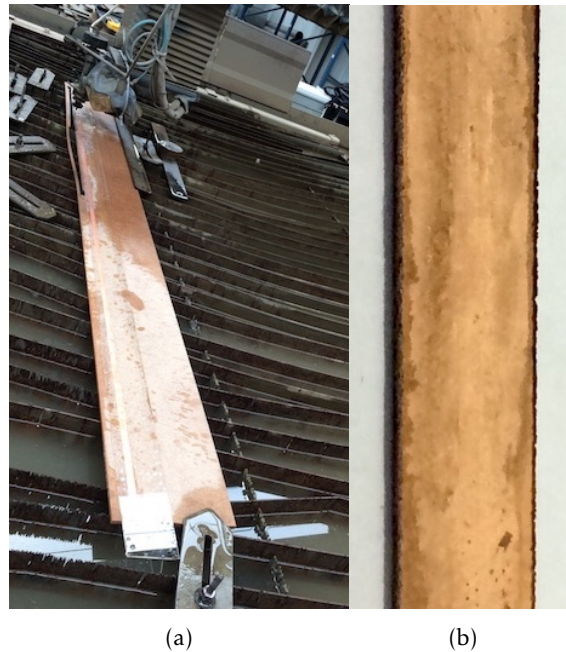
The issues on using the water jet cut method: (a) The fixing process of 2137 mm tape in the machine tank for the cut; (b) The roughness of the edge of the tape after the cut.
